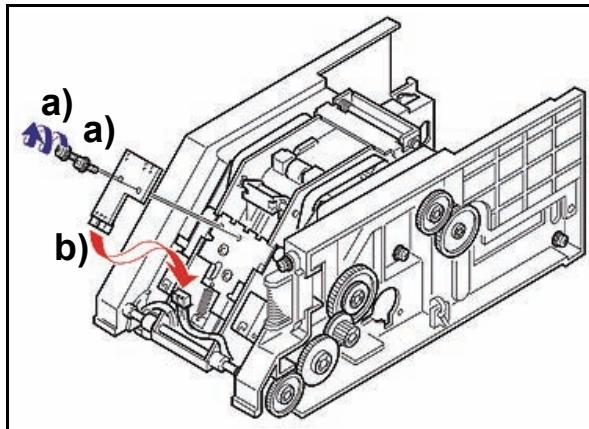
Transport Solenoid Lever Sensor Board Removal
